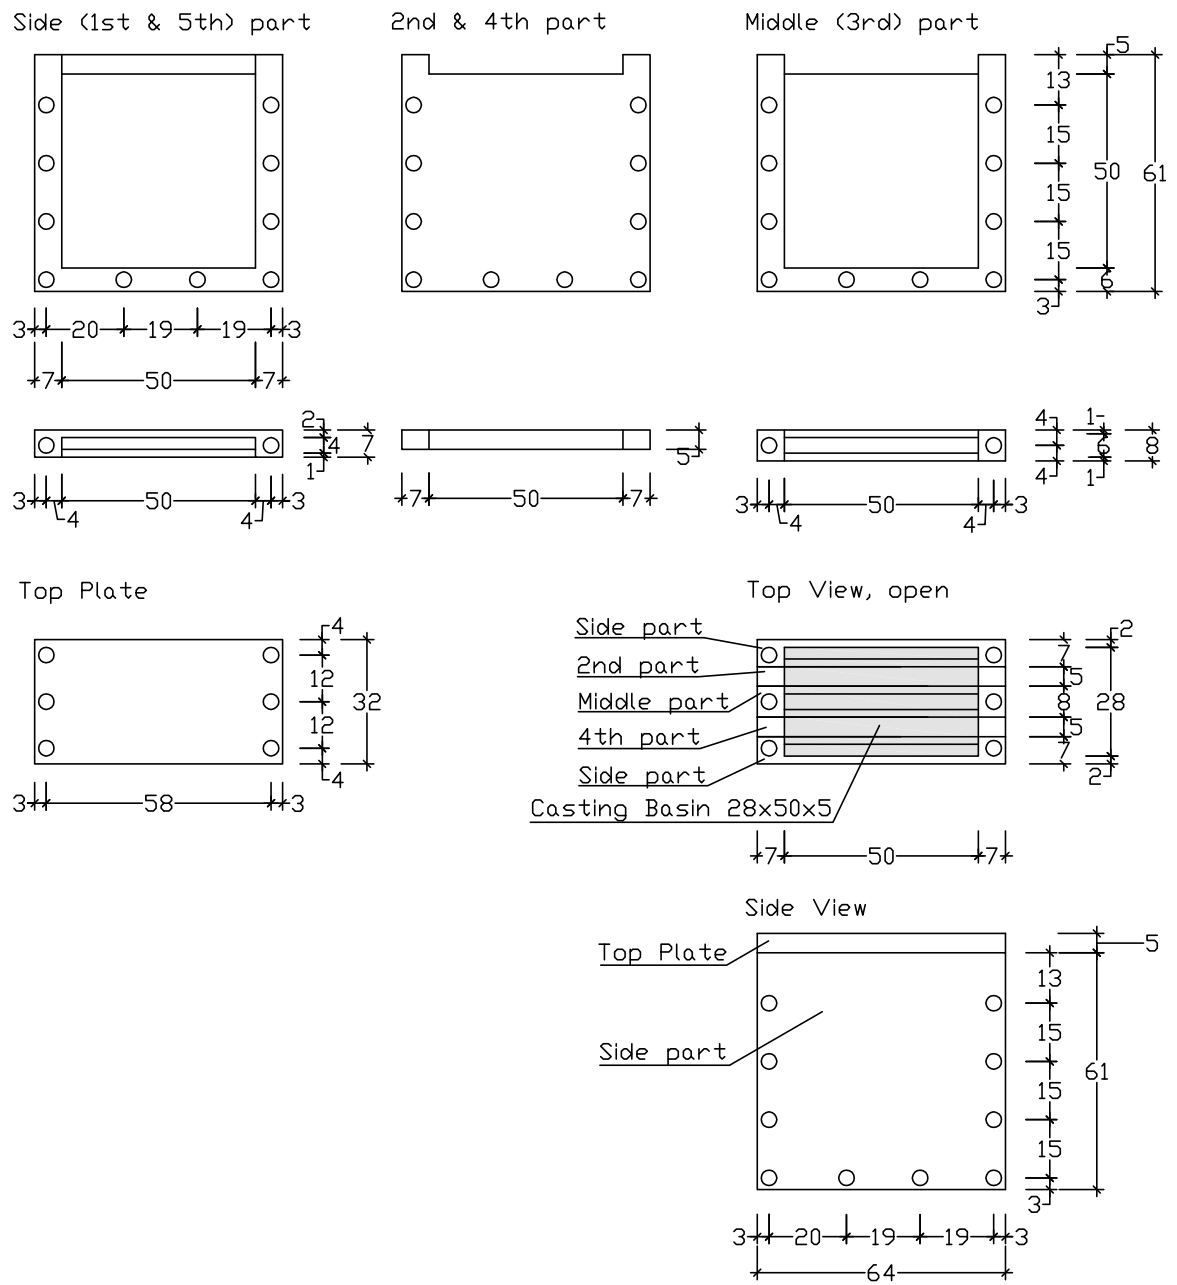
Technical drawing of the moulds used for preparing four biaxial samples ($b = 50 \text{ mm}$, $w = 50 \text{ mm}$, and $t = 2 \text{ mm}$).
